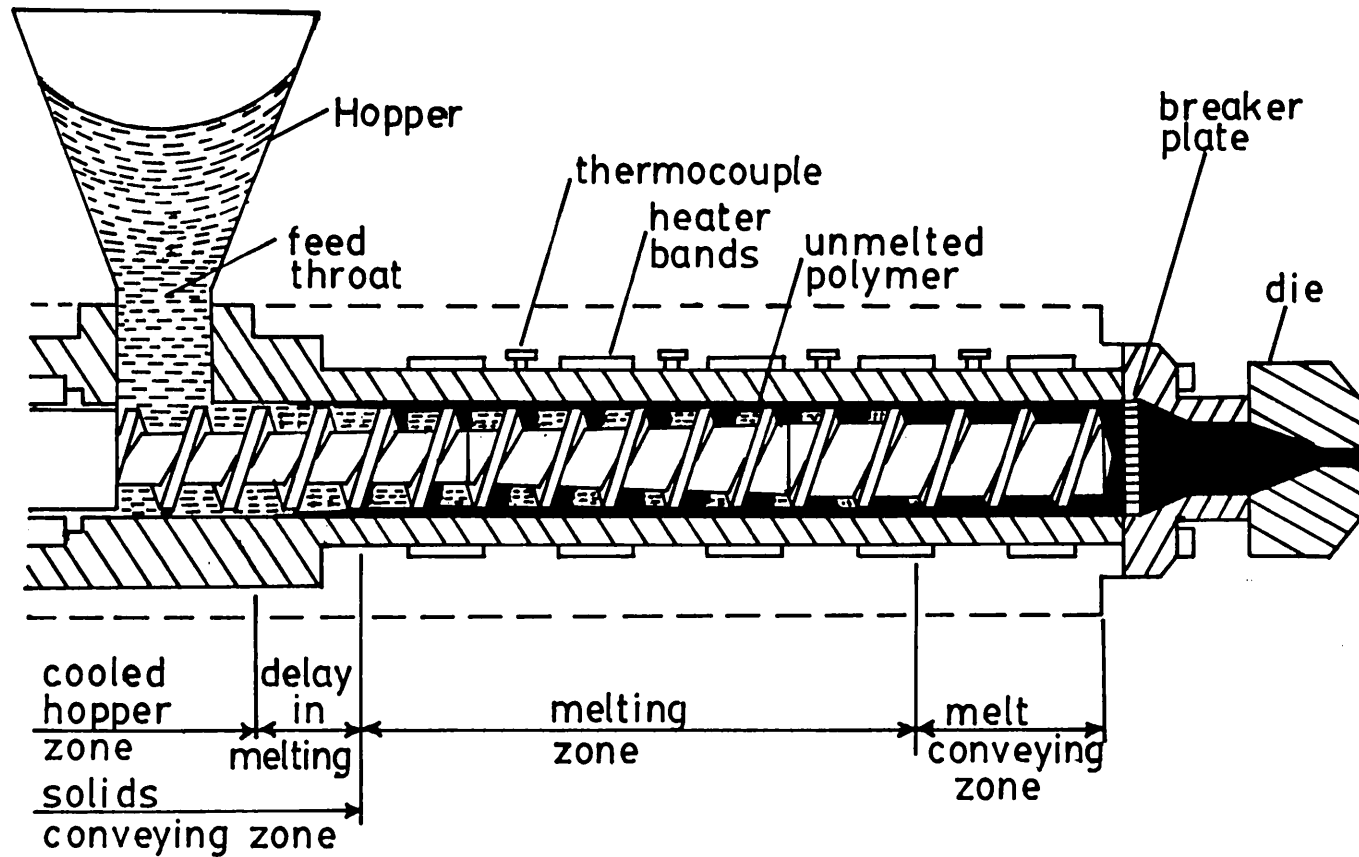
Cross-sectional view of a typical single screw plasticating extruder.
